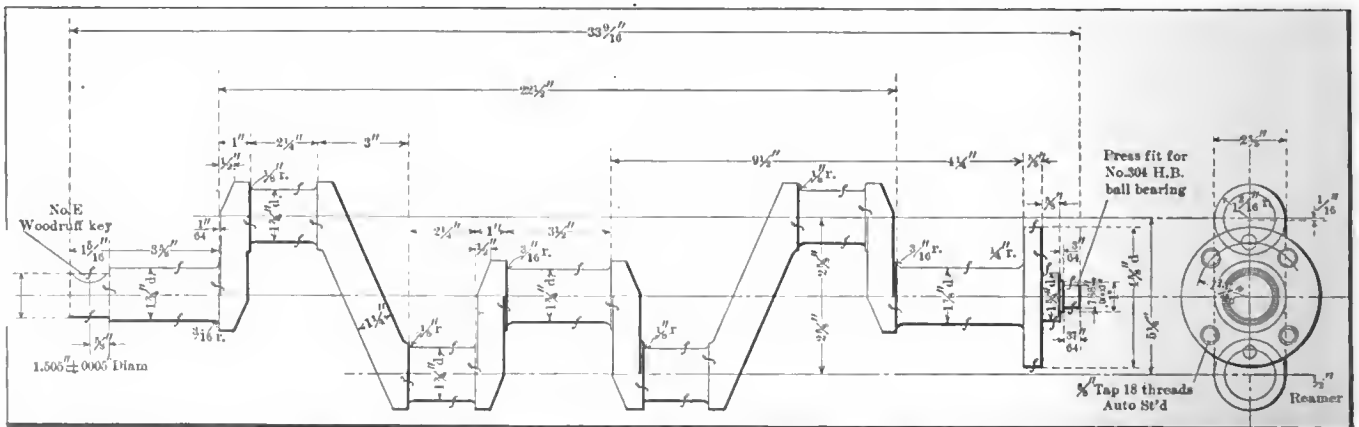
Premier crankshaft, with flange for flywheel, using fine material and shaped for long life in rigorous service
